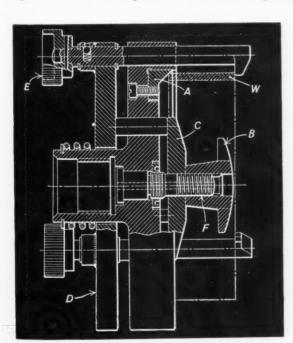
Chuck for clamping thin-walled parts for an internal roughing operation
